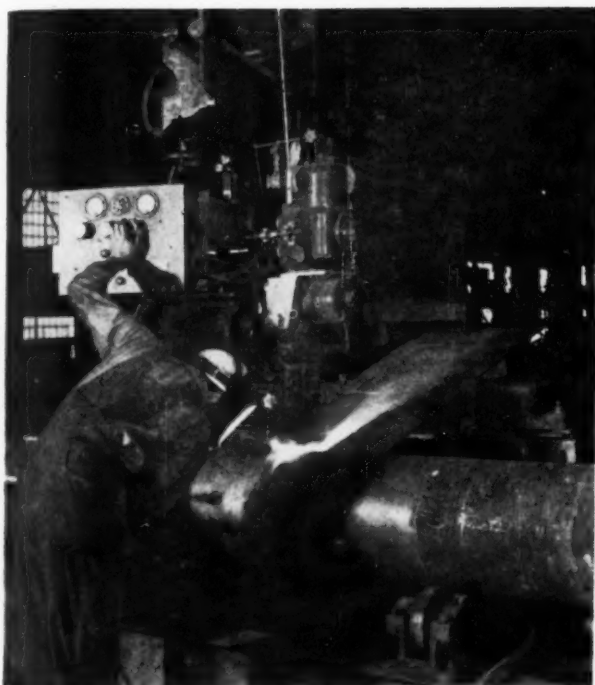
AUTOMATIC WELDING OF CENTRIFUGALLY CAST CARBON-STEEL SHIP SHAFTS
